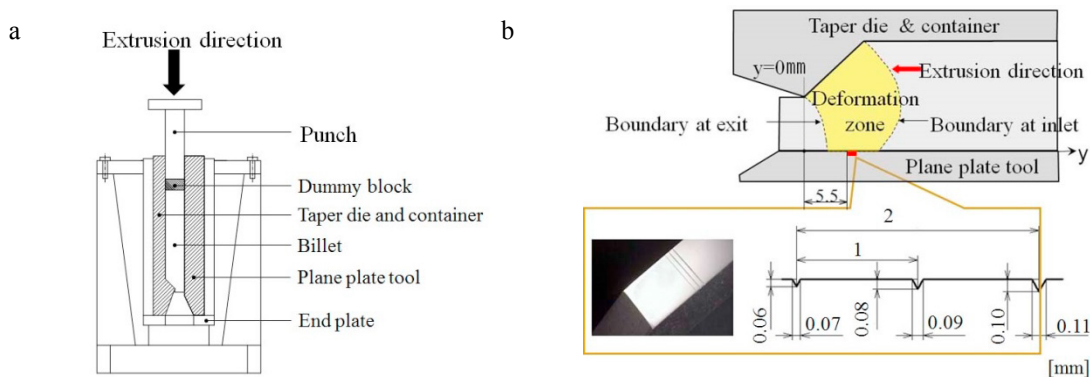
Experimental apparatus; (a) plane strain extrusion apparatus and workpiece (billet); (b) location and dimension of groove array.
